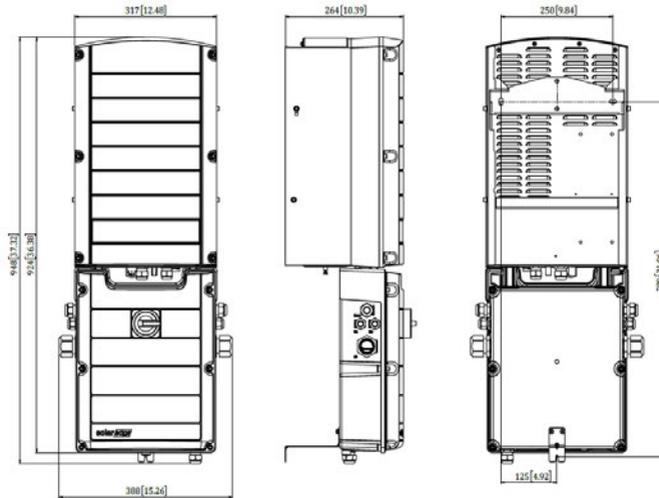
Primary Unit and Connection Unit - front, side and rear views
